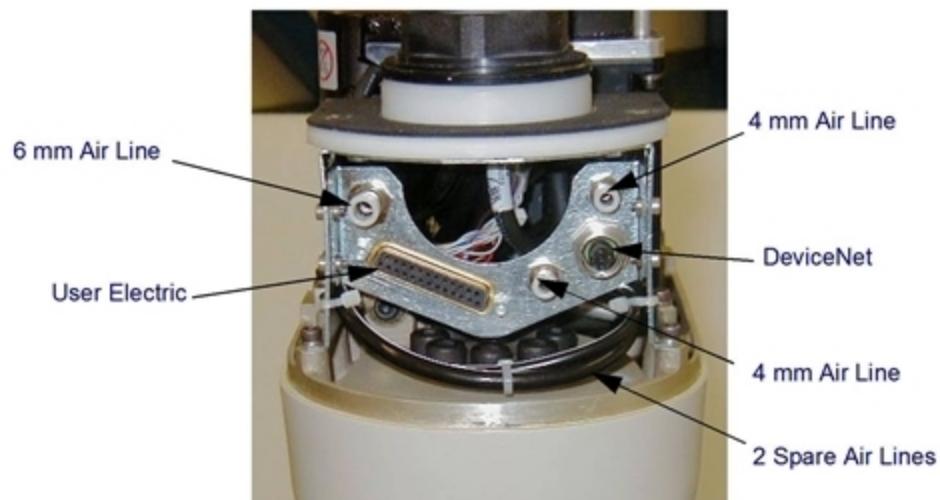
IP-65 Internal Connectors with Outer Link Cover Removed
